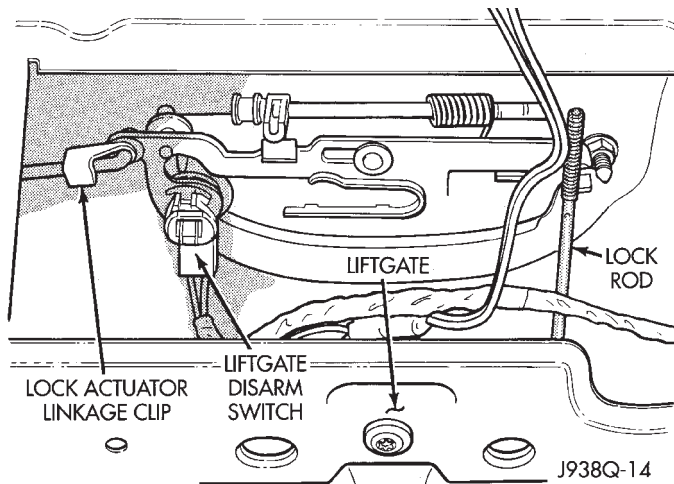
Liftgate Lock Cylinder Switch Remove/Install
